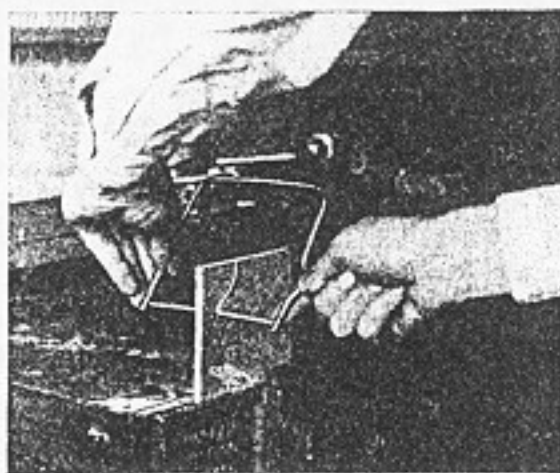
Sawing with a coping saw, work held in a bench vise.
